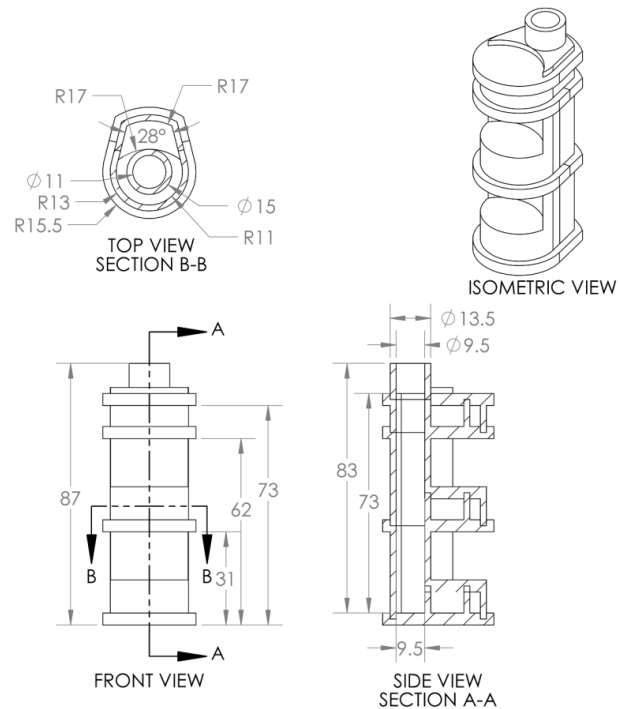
Orthogonal views of mold for encapsulation for finger actuator
